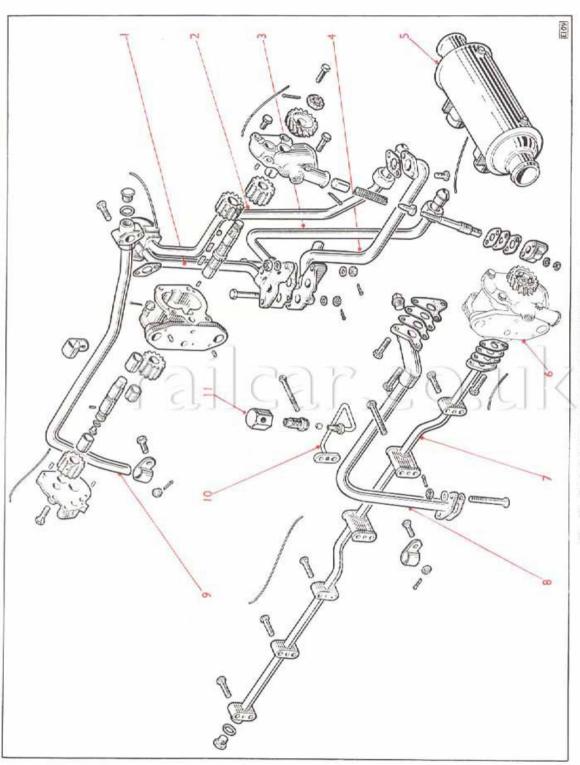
Exploded view of oil pumps and lubrication pipes.
